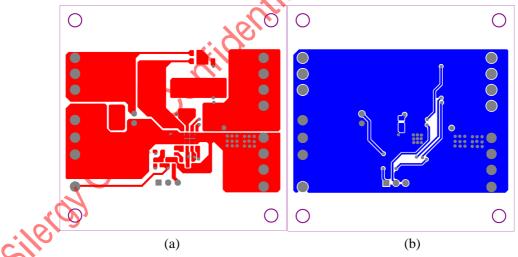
PCB Layout Plots: (a) Top layer, (b) Bottom layer
